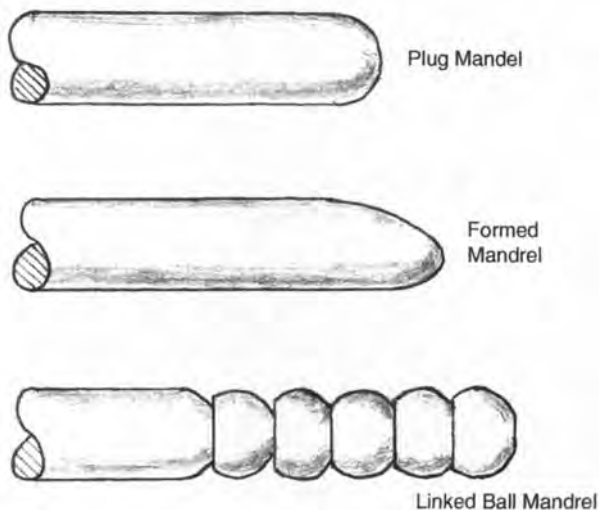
H2a-1 Mandrels used in tube bending to prevent collapse of the tubing during bending. The linked balls in the mandrel shown at the bottom can pivot to provide support to the tubing wall throughout a tight precision bend.
